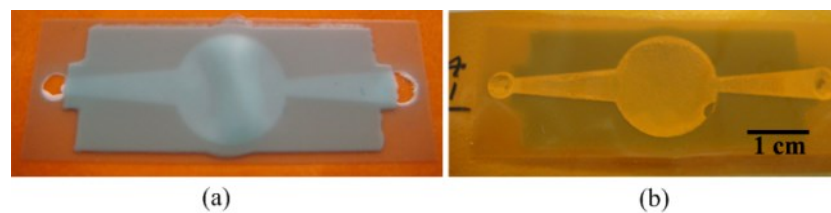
Example removal results of a single device viewed from (a) the top and (b) bottom (5 prints).
